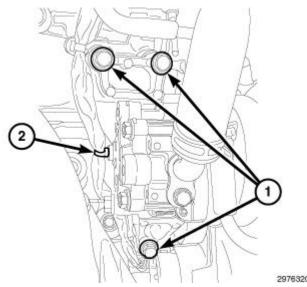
Power Steering Pump Bracket Bolts & Retainers Courtesy of CHRYSLER GROUP, LLC
